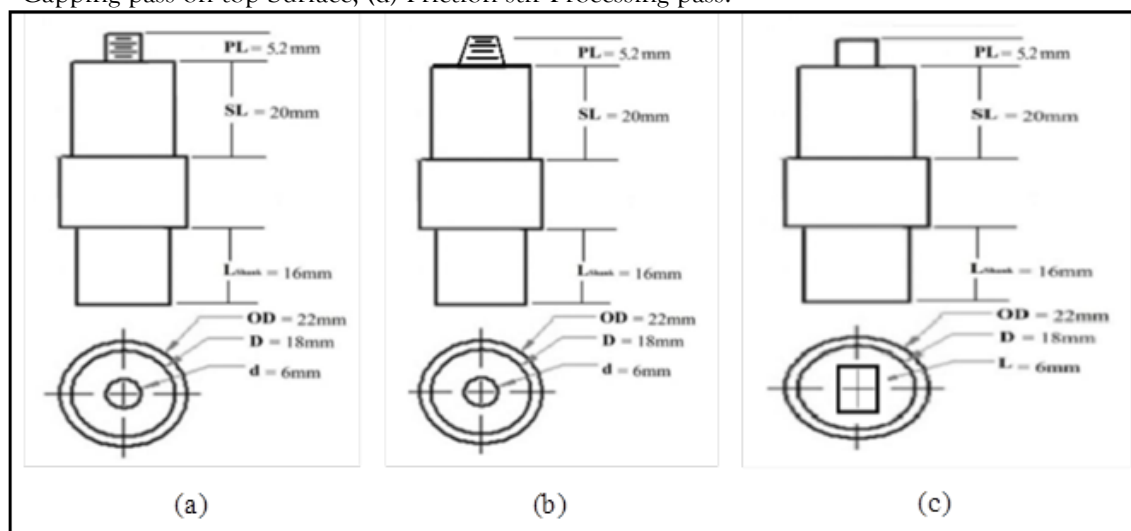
Tool pin profile: (a) Cylindrical threaded, (b) Taper threaded, (c) Square headed
